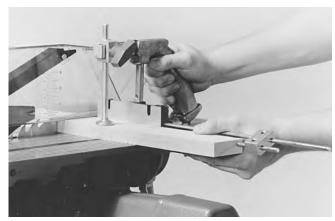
The miter gauge stop rod can be used to gauge the length of long or short workpieces depending on which rod is secured in the miter gauge.
